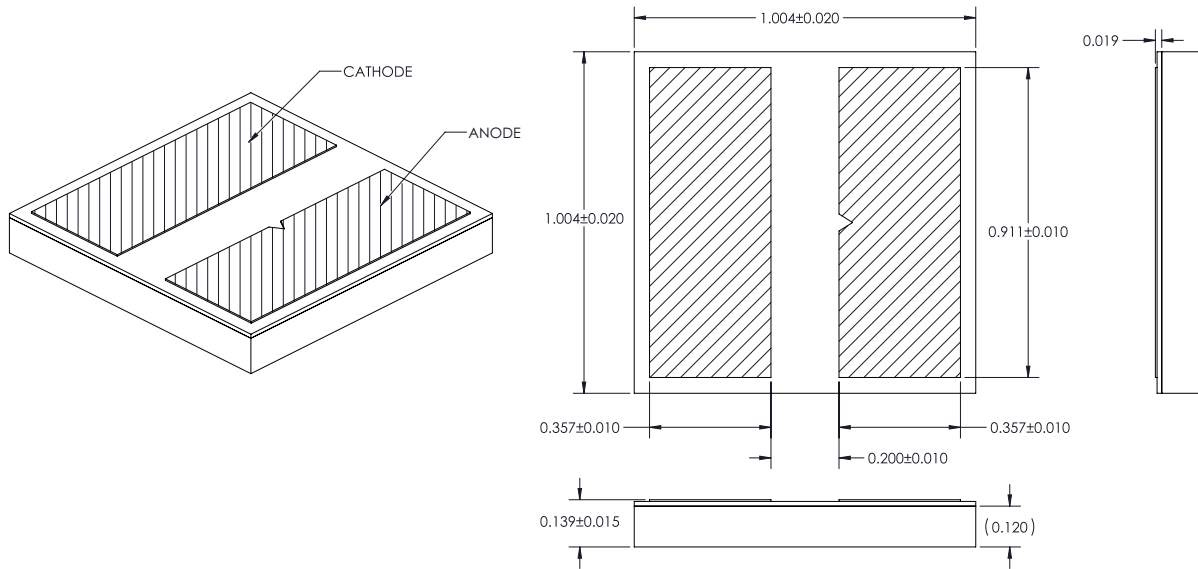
Mechanical dimensions for LUXEON UV FC Line.
